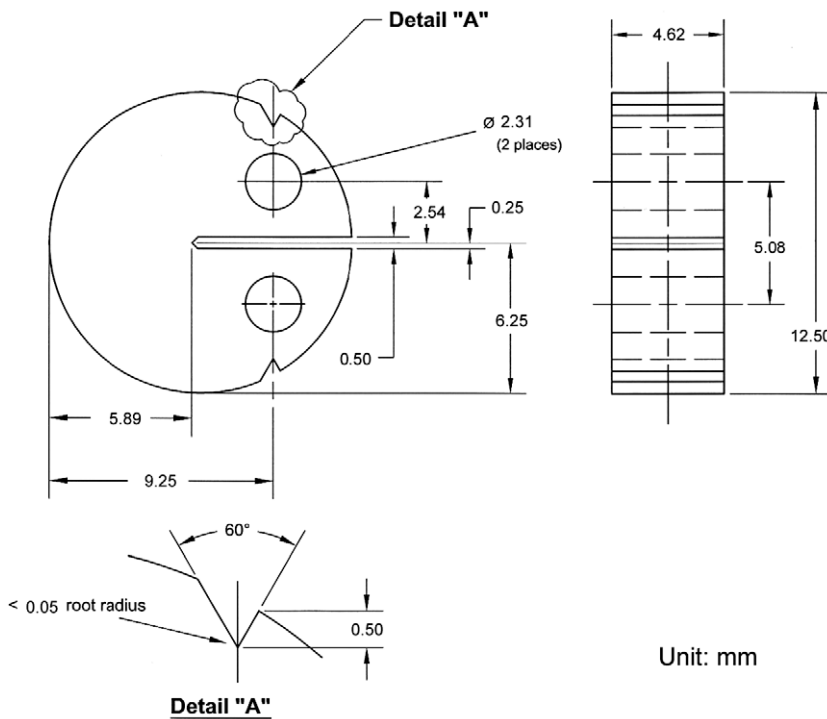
Schematic drawing of a 0.18T disk compact tension (DCT) specimen.
